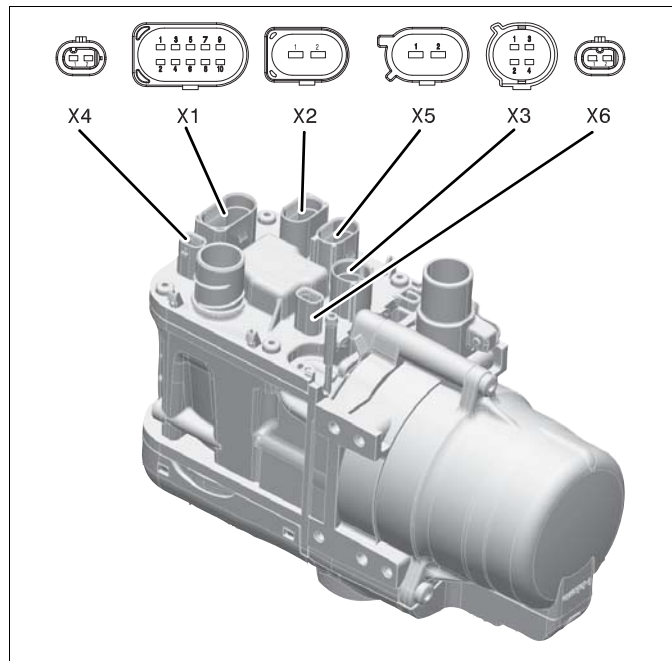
Combustion-air fan unit with illustration of connectors (variant shown is equipped with the maximum connector assignment)
